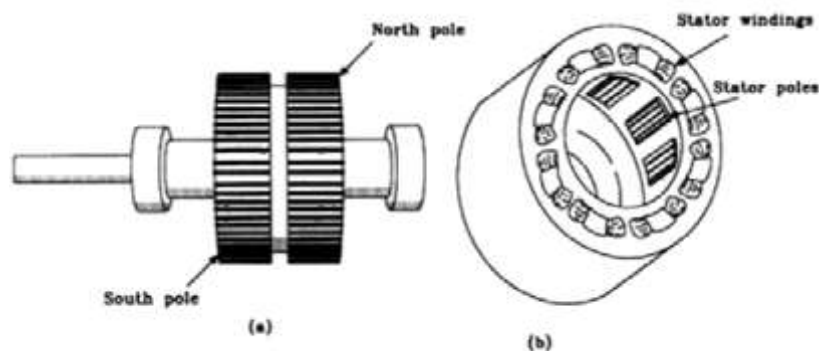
Components of a PM stepper motor: (a) Rotor; (b) stator
